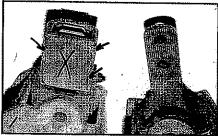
'64-'65 factory Hurst shifters used this simple bolt-on lever setup (right). After the Inland disaster, Hurst supplied this rubber-isolated slip-in setup (left) through 1971. Best idea for these: grind away the weld (arrows) and discard the piece marked "X" and the rubber trash. Then, drill through the shifter and lever, and bolt up with hardened 3/8" bolts and locknuts. Solid!
